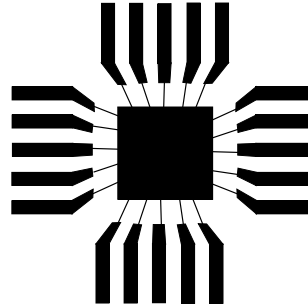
Package sample for resistance and inductance measurements. Lead frames are shorted to paddle or test die.
